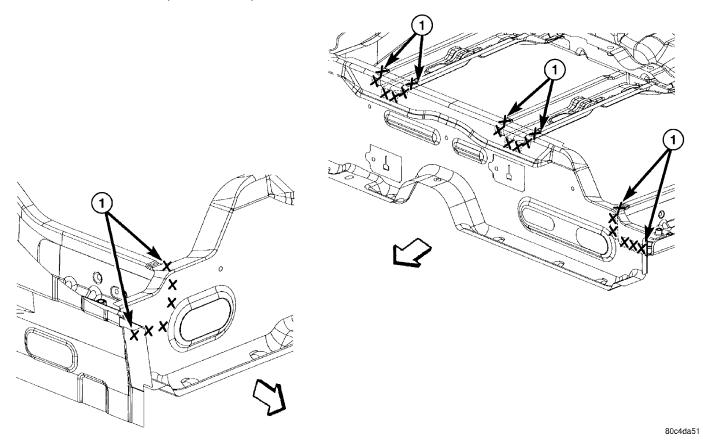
REAR FLOOR PAN FRONT KICK UP CROSSMEMBER TO FUEL TANK SUPPORT REINFORCEMENT AND REAR FLOOR PAN SIDE RAILS
